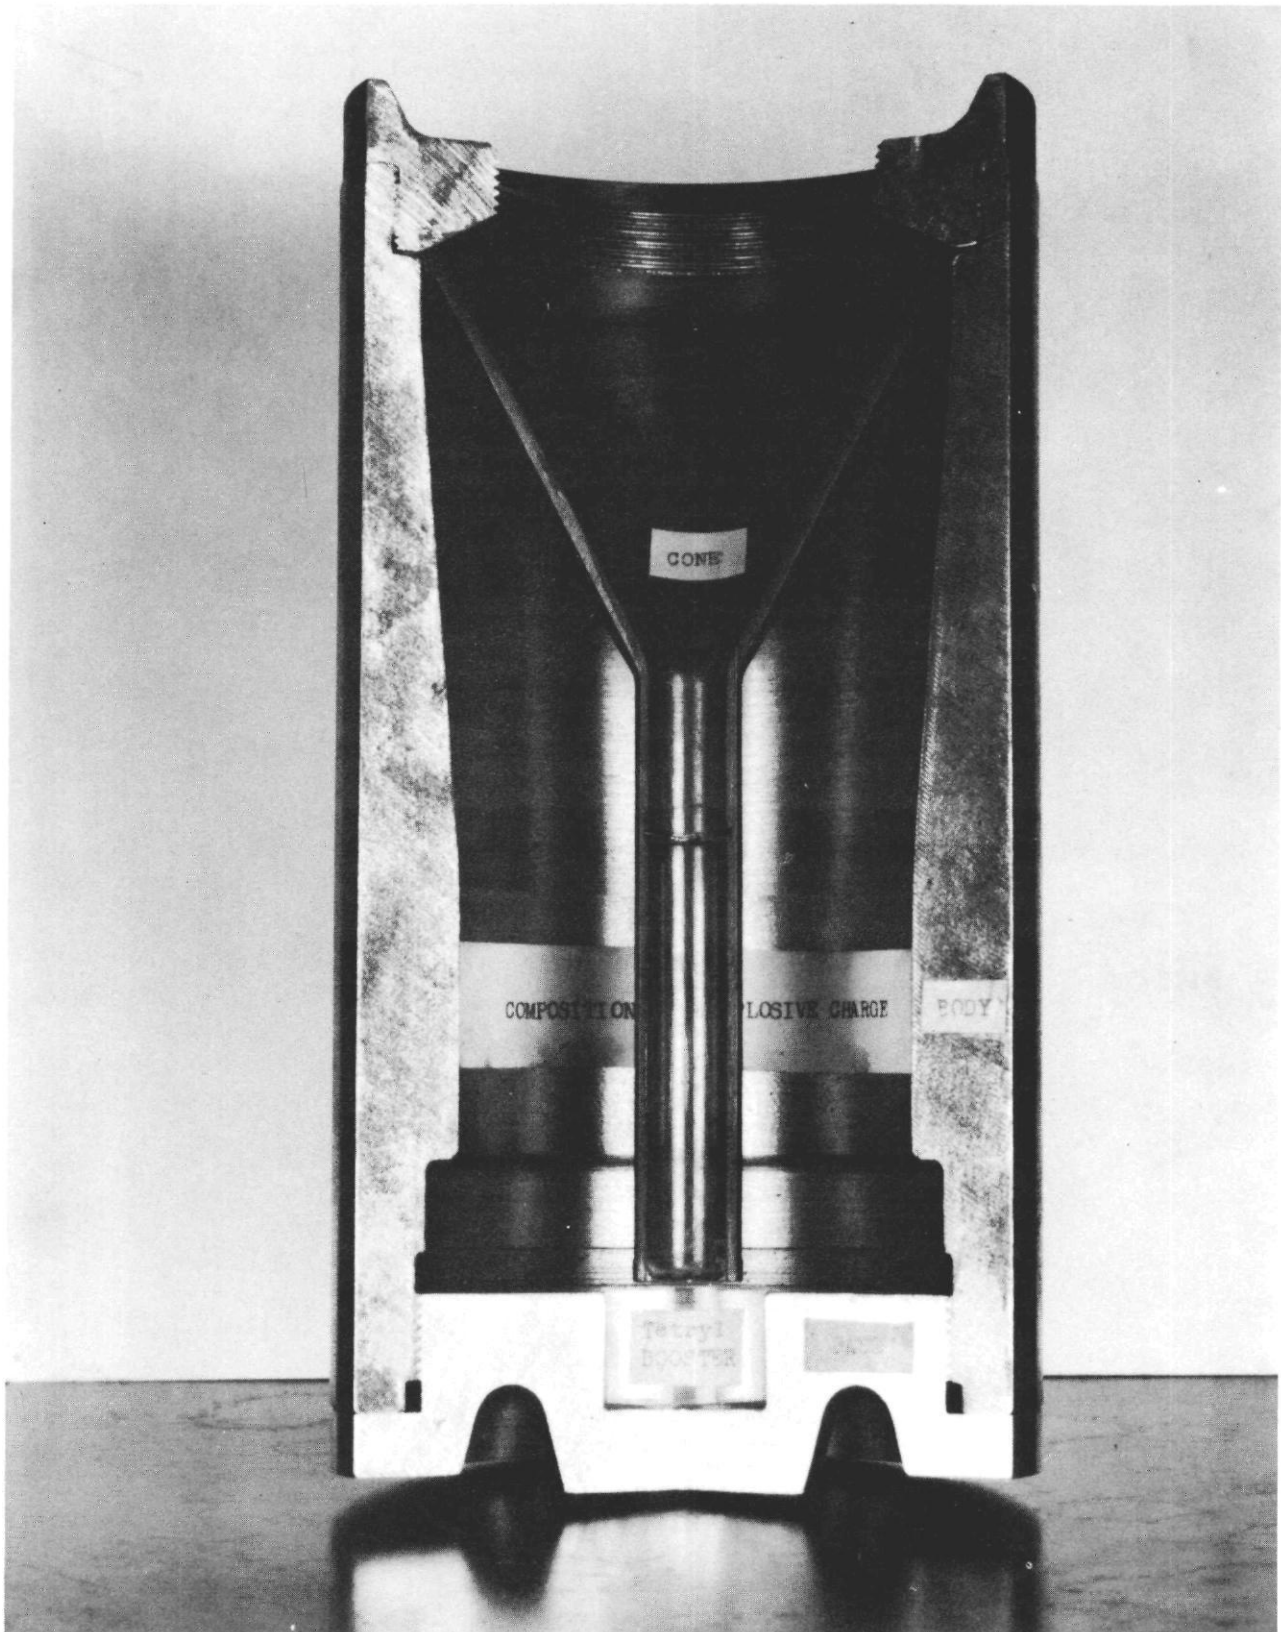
Cut-away view of the 105 mm projectile used in the experiments.
